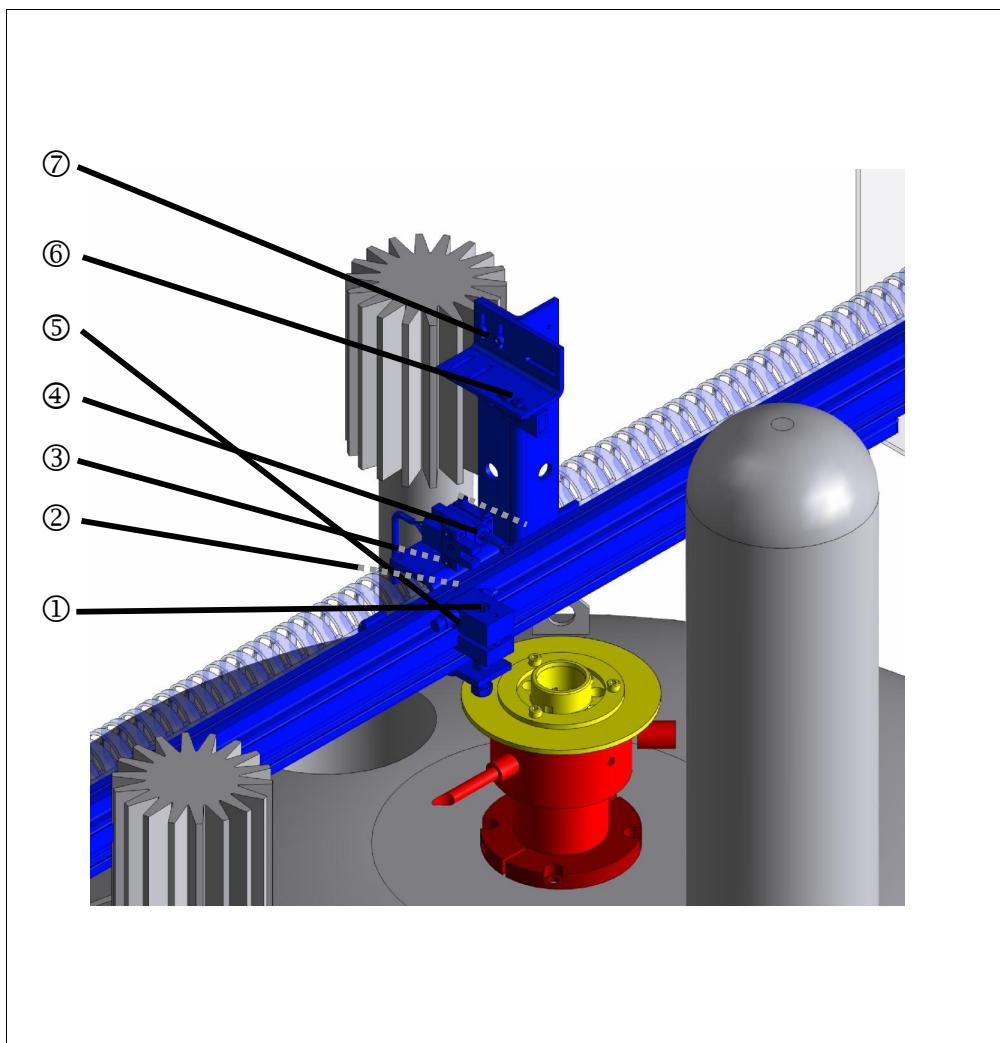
Critical screws to be tightened on the LINEAR AXIS UNIT
